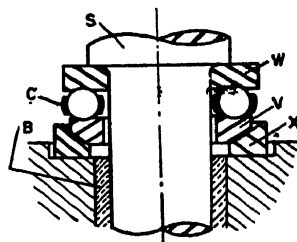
Self-aligning Ball Thrust Bearing.
